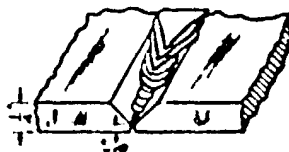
Butt joint design for sheet lead over $\frac{1}{8}$ in. thick
